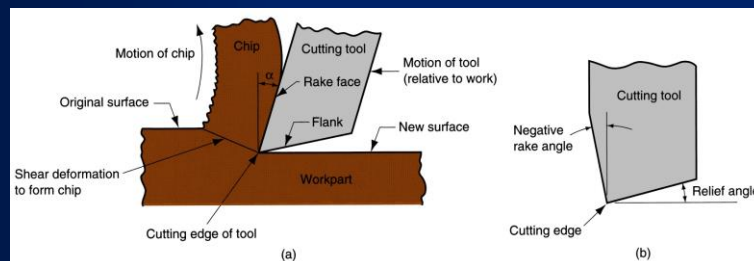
(a) A cross-sectional view of the machining process, (b) tool with negative rake angle; compare with positive rake angle in (a)
